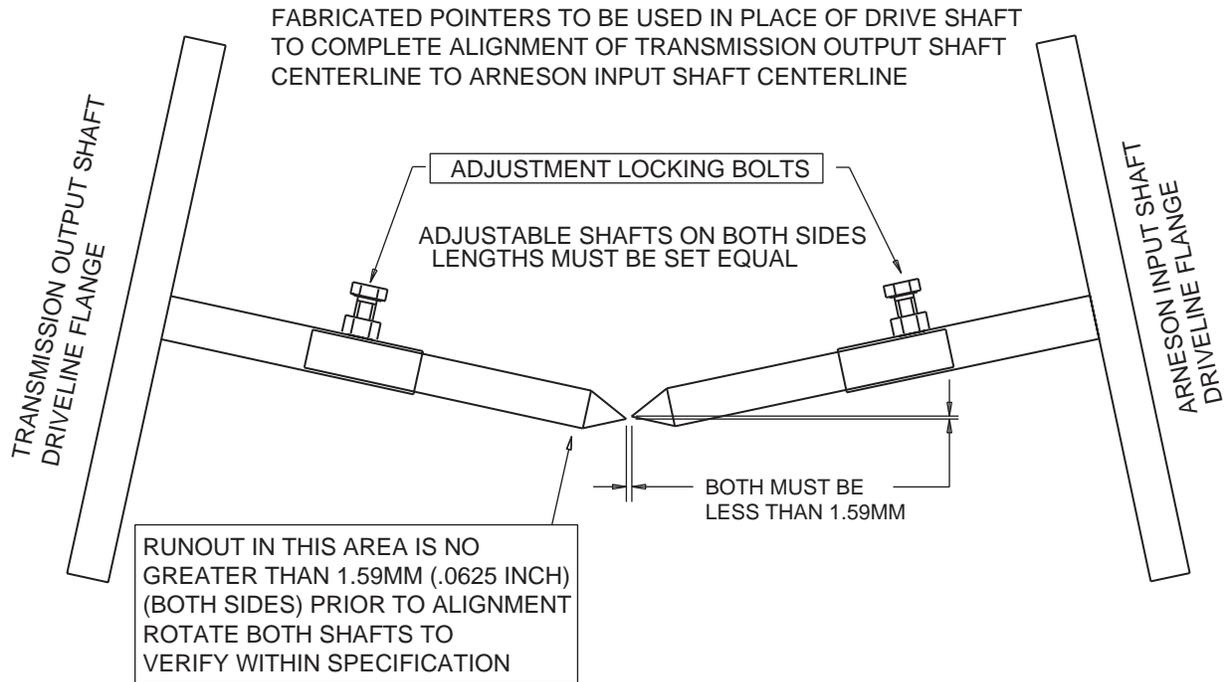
Remote or Island Mounted Alignment Tool, Shafts not Parallel
